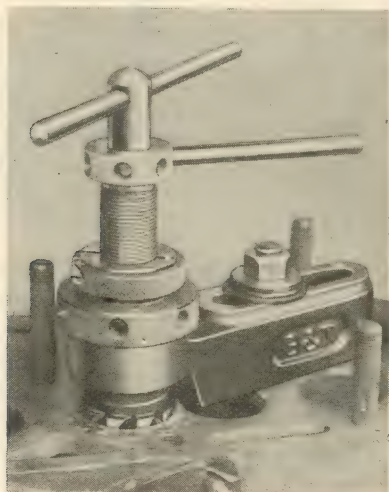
THE BONEHAM AND TURNER INSERT RING TOOL
